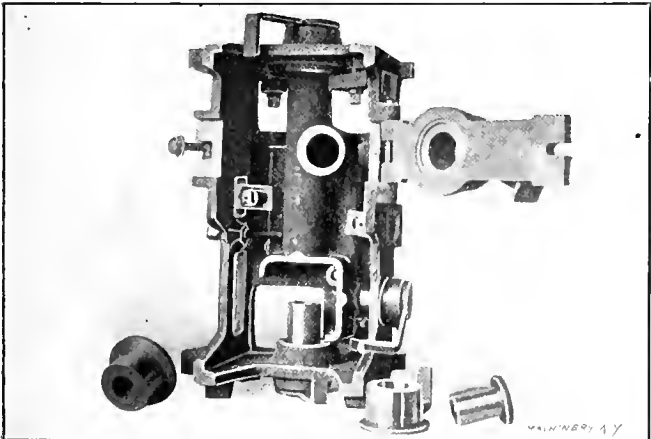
Closed Drill Jig, showing Leaf Opened.
